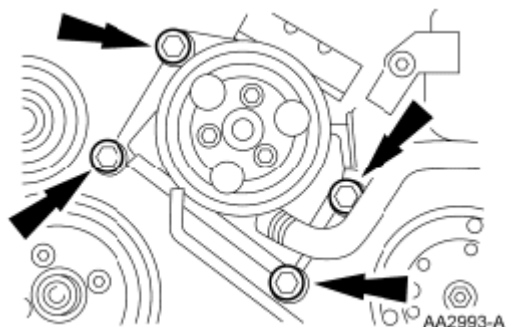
Locating A/C Compressor And Power Steering Pump Bracket Bolts
